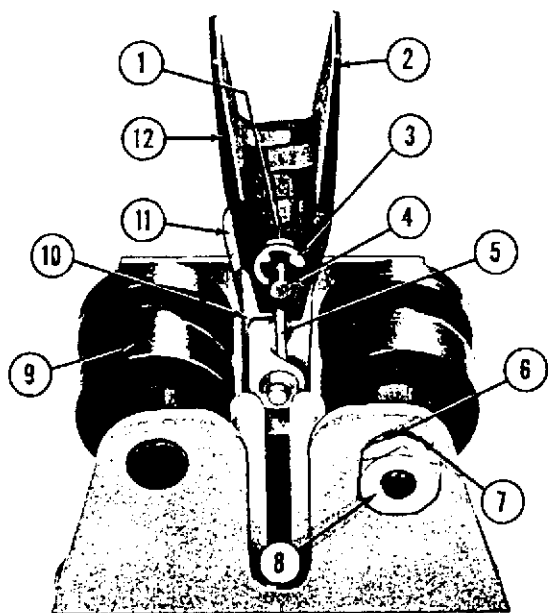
BRACKET AND ROLLER ASSEMBLY, LIFT ARM GUIDE
